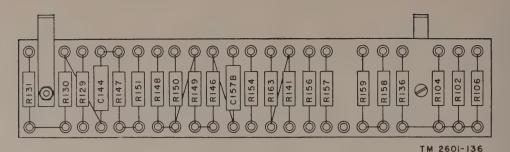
Radio Receiver R-19H/TRC-1, main component mounting board.
